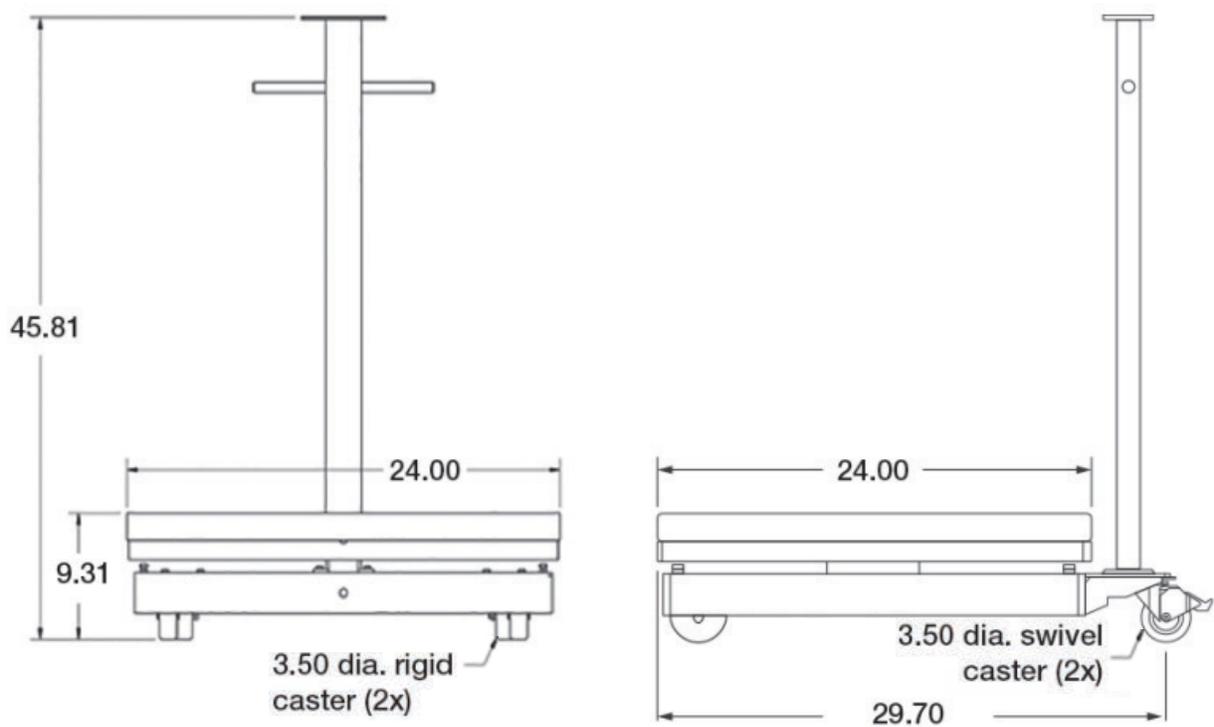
BenchMark HDP Caster Model Dimensions (in inches)
